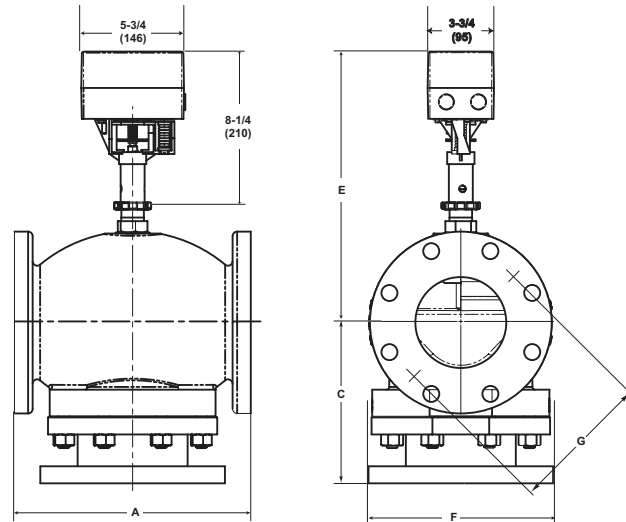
Mx-631x3 Series with Flanged 3-Way Globe Valves
